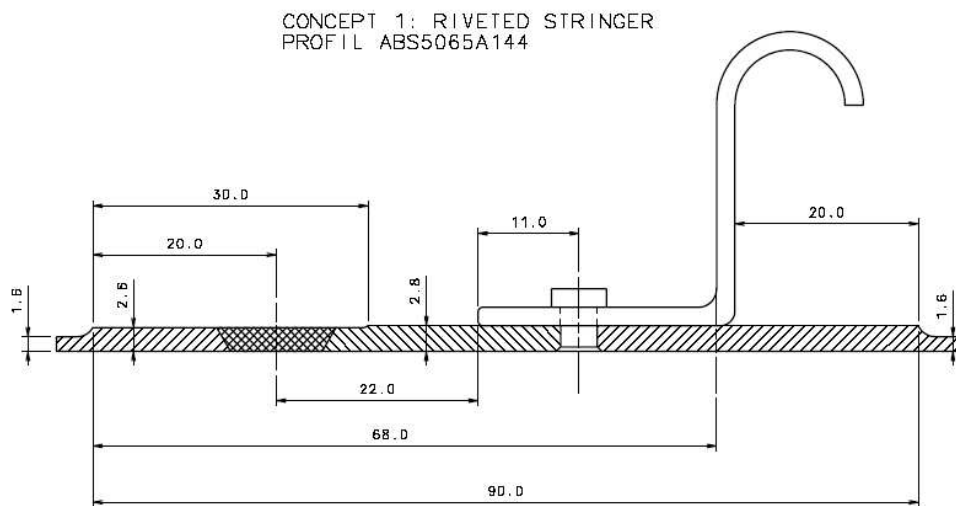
Section of the hybrid concept: FSW and rivetted stringer [164].
